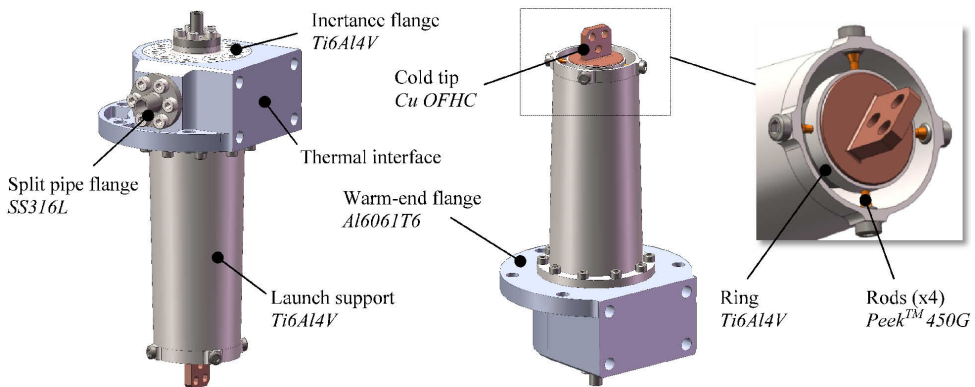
CAD views of the 150 K Pulse Tube cold finger.
